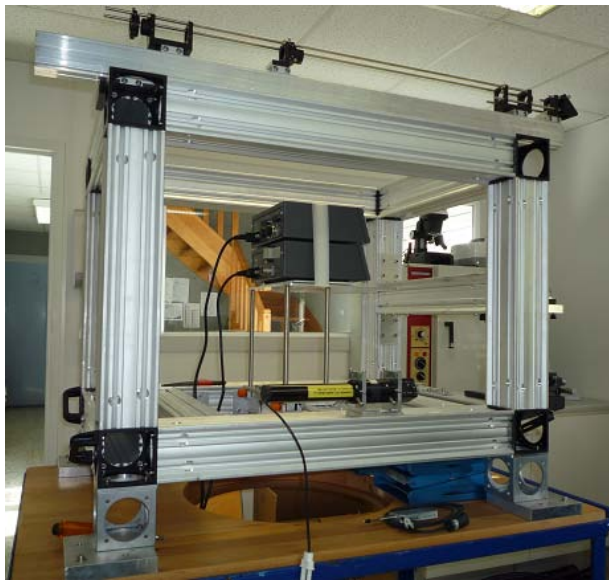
STRAP lens-let array assembly tool, one completed lens-let array
